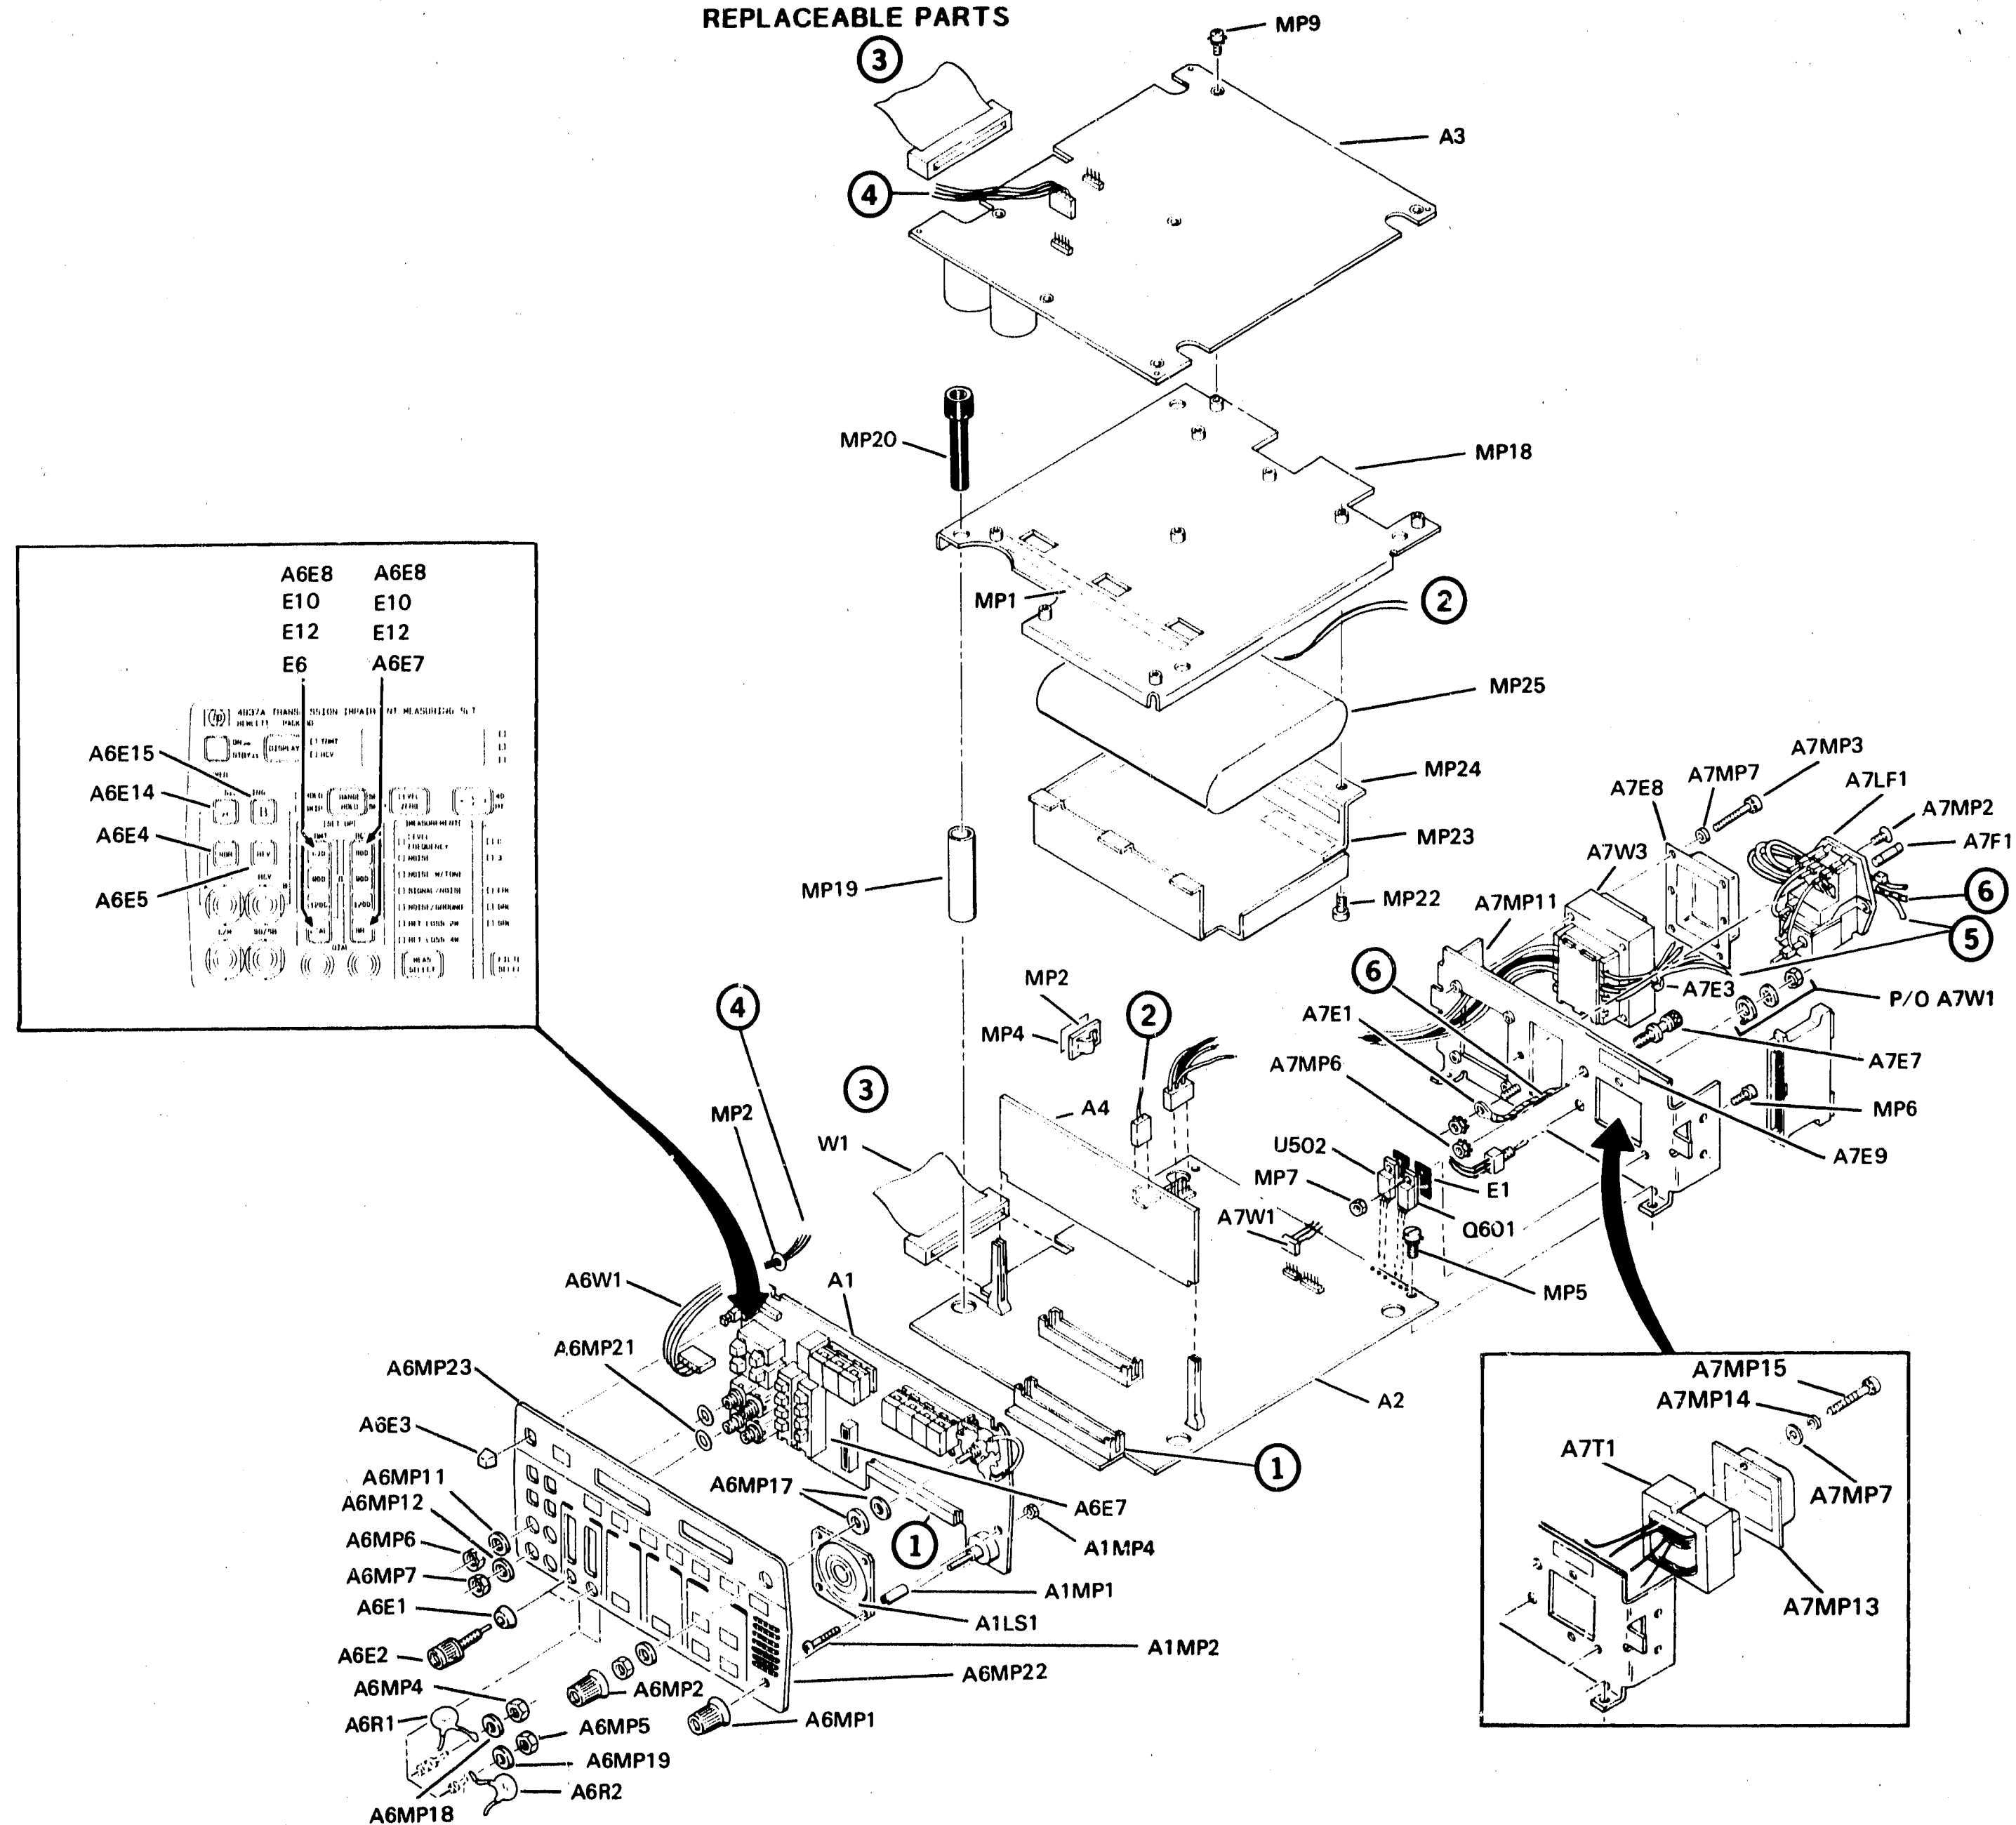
Illustrated Parts Breakdown of Assemblies
